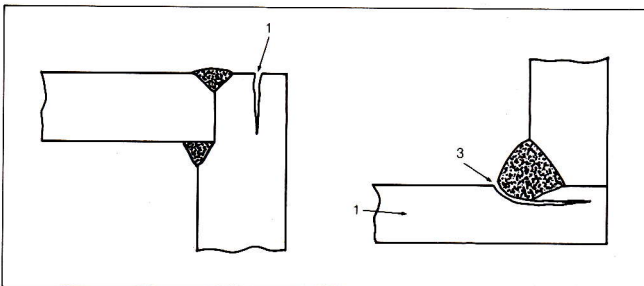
Principal types of stress corrosion cracks occurred in a welded structure made with plates of Al-Zn-Mg 7000 alloy:
